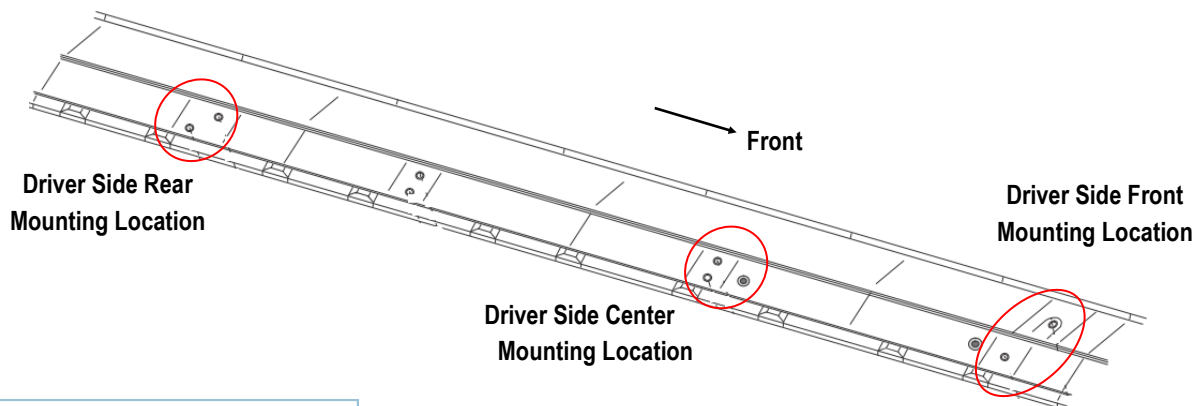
Driver Front Mounting Bracket (DFM) Installation
